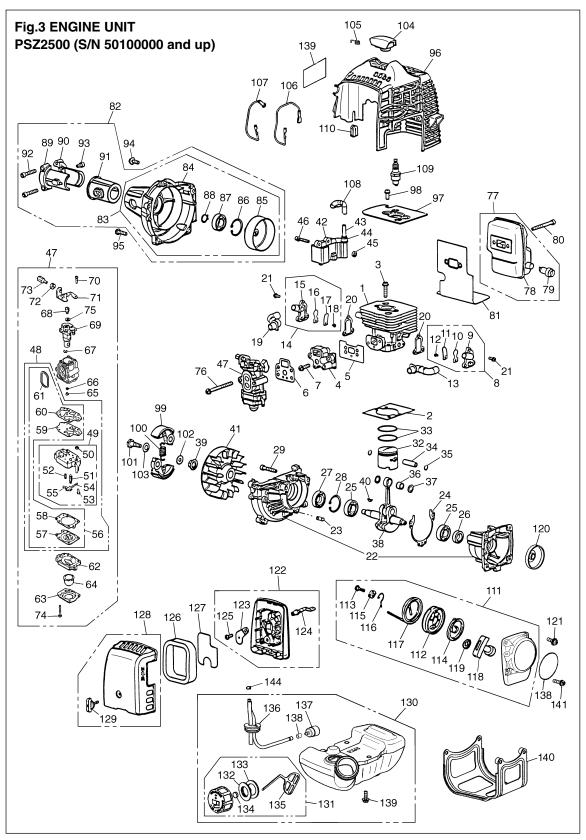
ENGINE UNIT PSZ2500 (S/N 50100000 and up)
